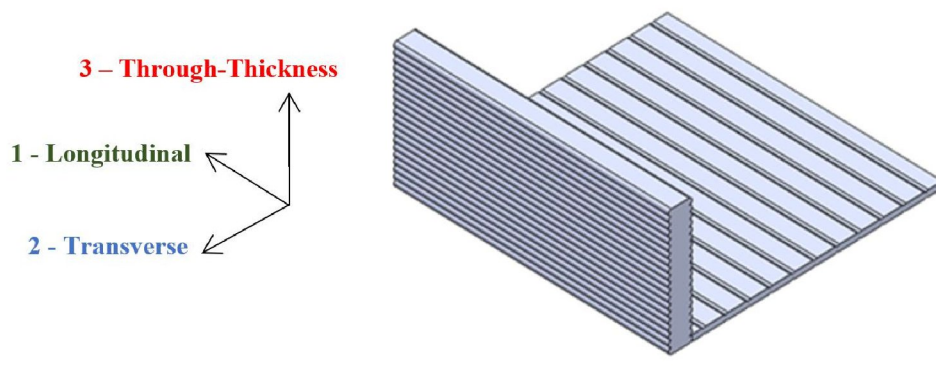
Printing directions considered for large-scale 3D printed specimens
